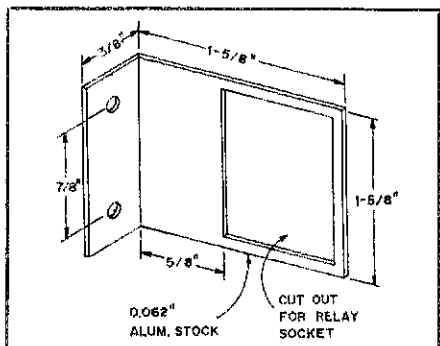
Relay assembly mounting bracket. Inches (") \times 25.4 = mm.
